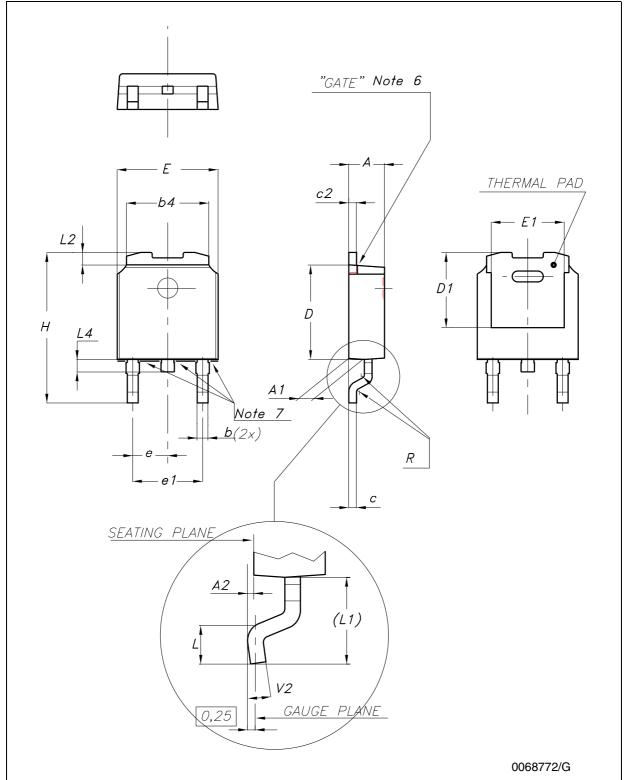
DRAWING DIMENSION DPAK (TYPE STD-ST)
